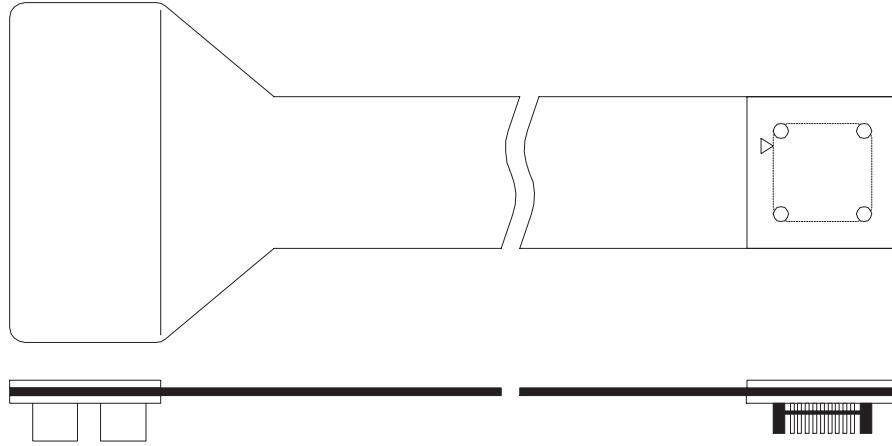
IC Socket-Type (DIP Type) Probe Cable
